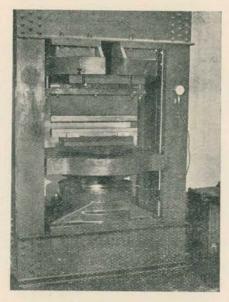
A 200-Ton Hydraulic Press for Forming Short Test-Specimers
